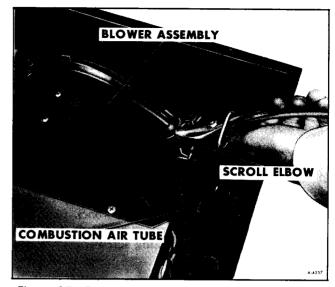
Disconnecting Combustion Air Tube from Blower Assembly
